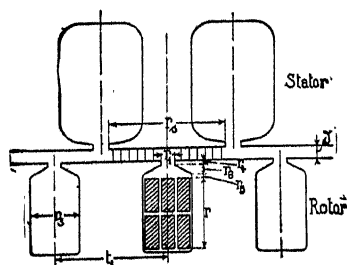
MOTOR WITH UNIFORMLY DISTRIBUTED STATOR IRON.
